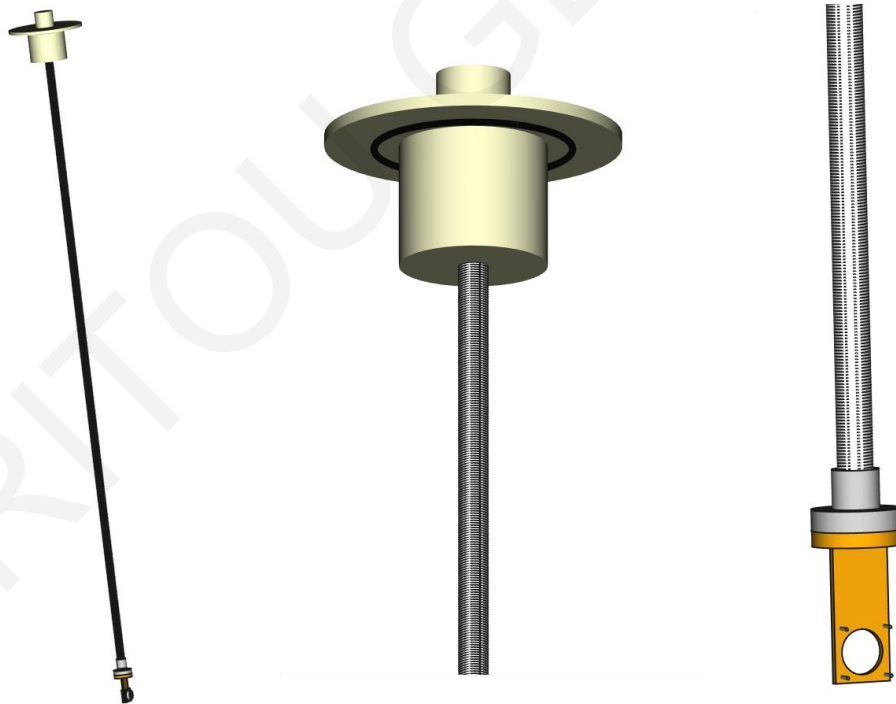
A schematic diagram of the new sample rod is shown. The top (beige) part and the sample holder (orange) are connected with a solid stainless-steel threaded rod.
